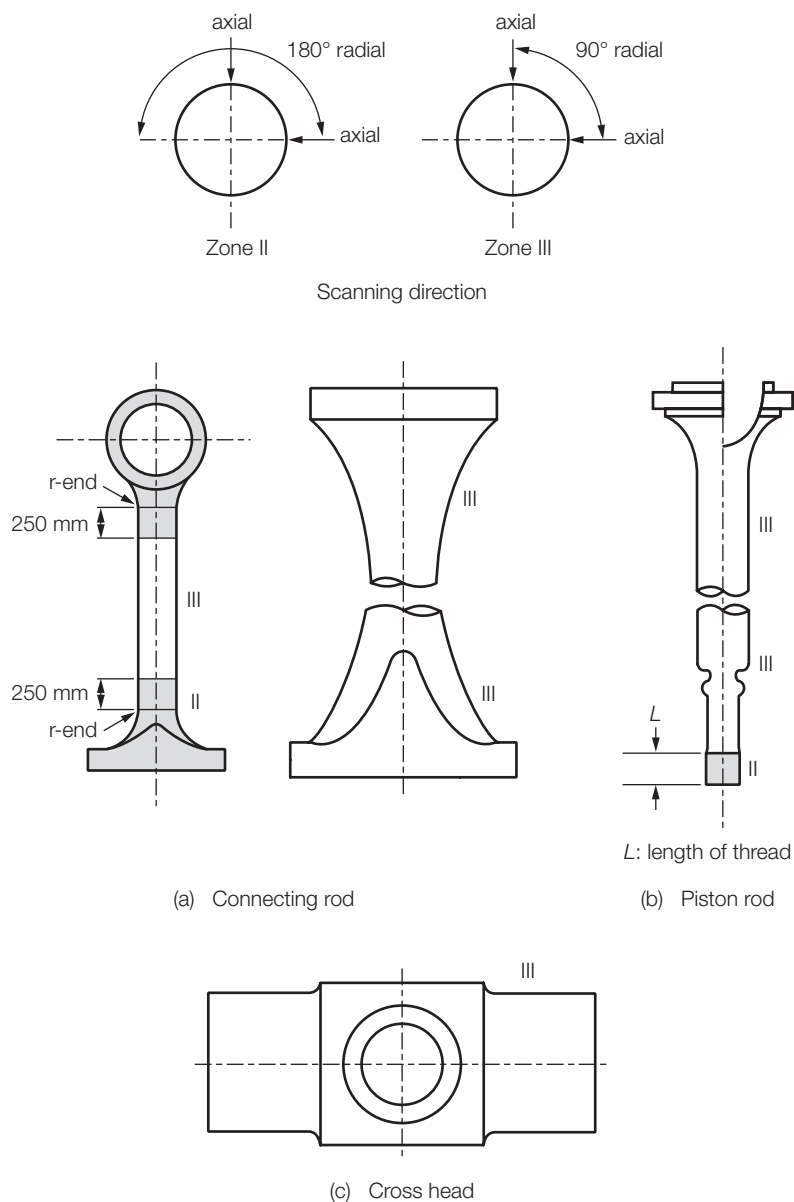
Zones for ultrasonic testing on machinery components
